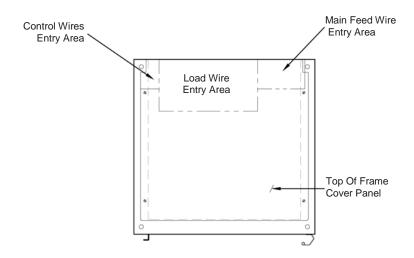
Recommended Conduit Cutouts (Top of Rack)
